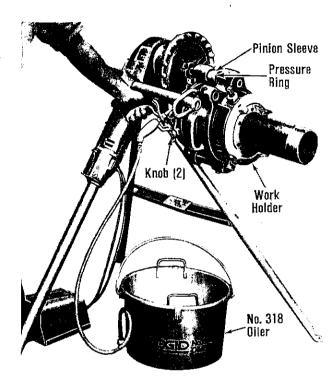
Threading Pipe with No. 141 Geared Threader (Close-Coupled Method) (No. 4PJ Threader Similar).
